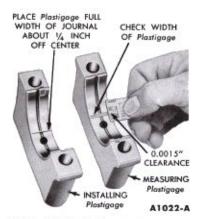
Installing and Measuring Plastigage—Engine Installed
